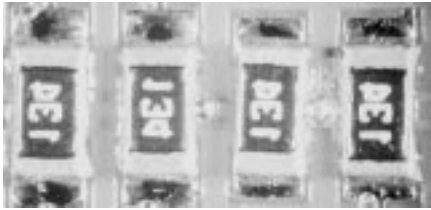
Solder beads often result from paste slumping. Remember to check this possibility when tracking down the cause of beads.
